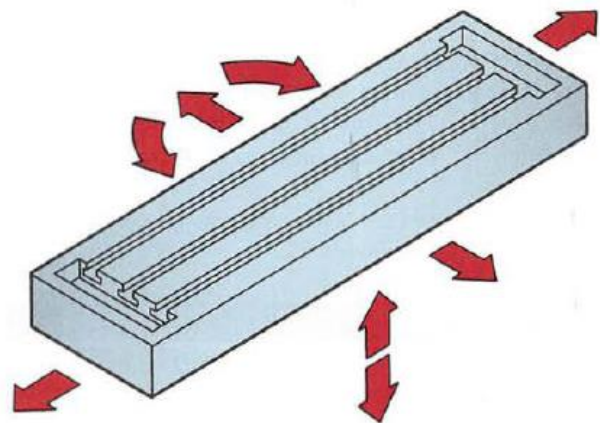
universal horizontal milling machine Figure 3.6. Table movements a universal milling machine
